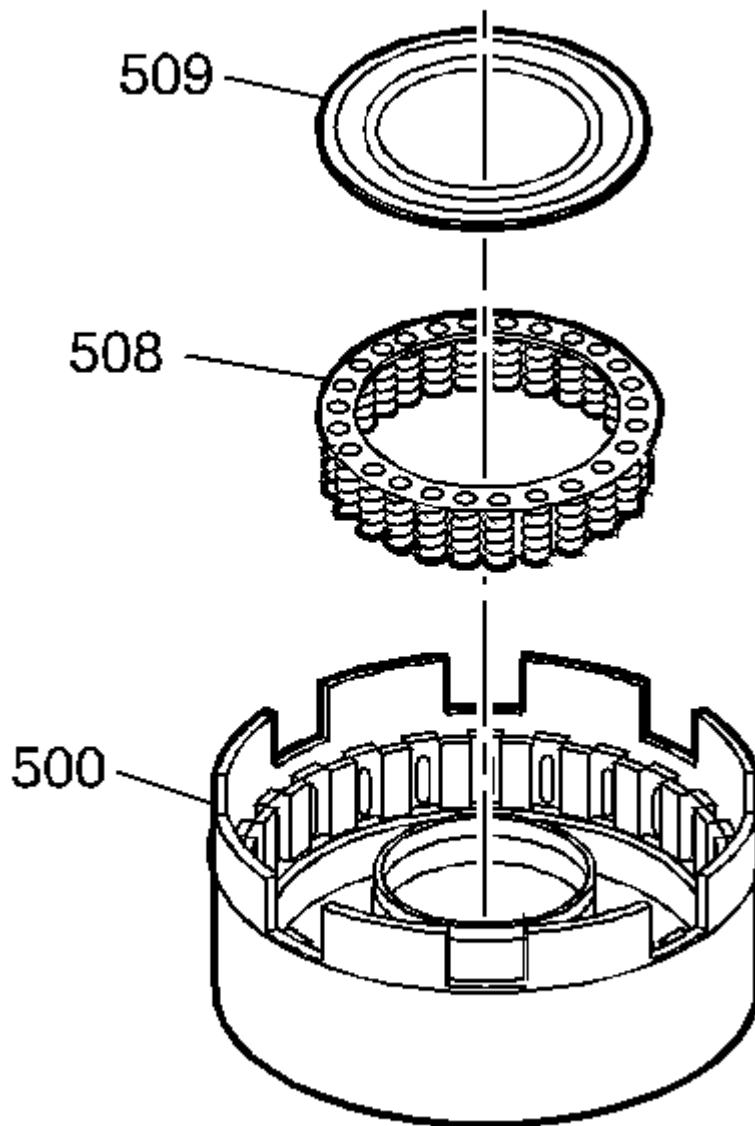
Locating Spring And Retainer Assembly Into The Reverse Clutch Housing
